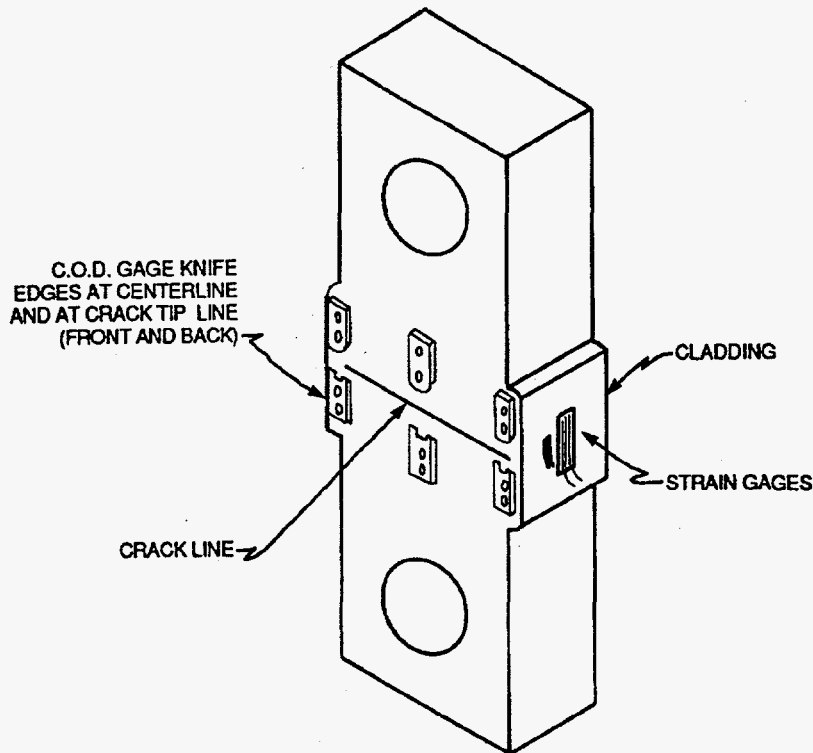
Isometric drawing of Jo-Block specimen used to measure properties of clad layer over subclad flaw.
